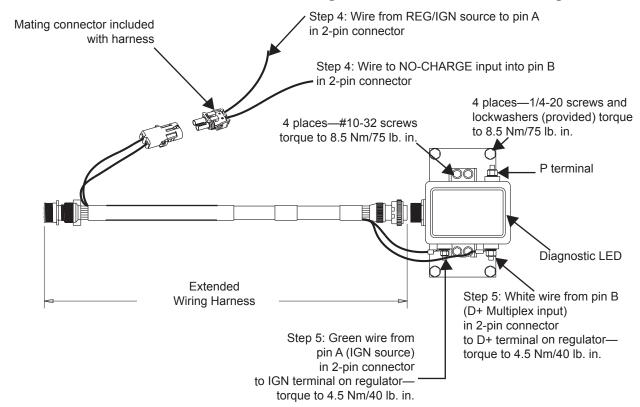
Remote Mounted Commercial Regulator with Extended Alternator Wiring Harness
